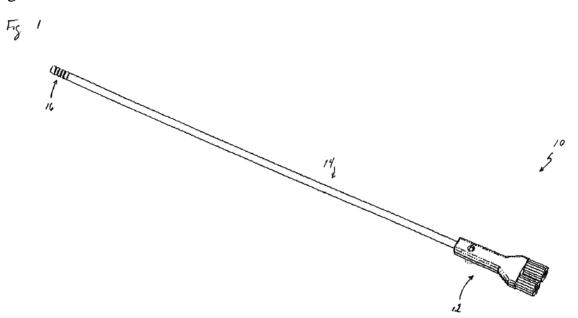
shows a perspective view of laparoscopic spray device 10. *Id.* ¶ 13. Spray device 10 can be used to dispense multiple components from material applicator 34. *Id.* ¶ 40, Fig. 6 (shown below).
